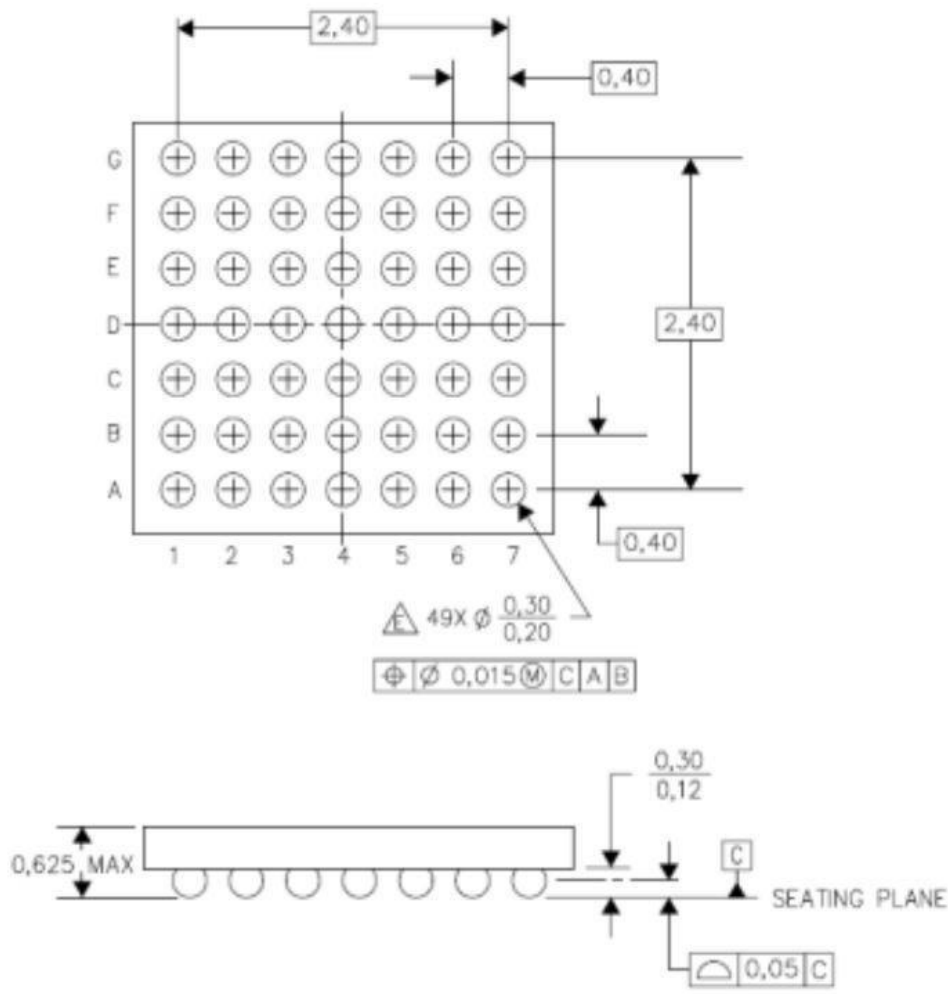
TI 49YFF Solder Ball Pattern [5]
